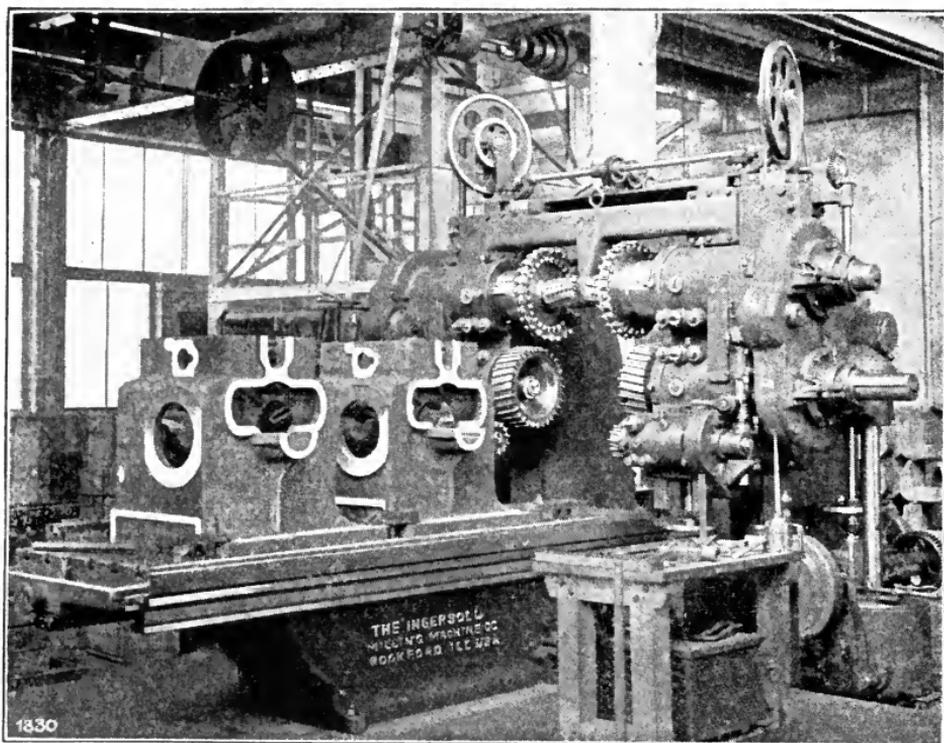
Ingersoll Horizontal Milling Machine, Milling Gasoline Traction Engine Frames. $\frac{1}{2}$ Inch of Metal Removed from each of Six Surfaces. 14 Bases Finished in 10 Hours.
